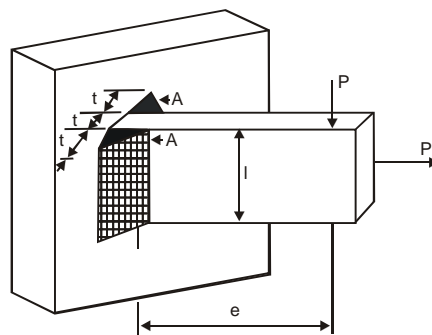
A T-Joint under Axial and Eccentric Load
